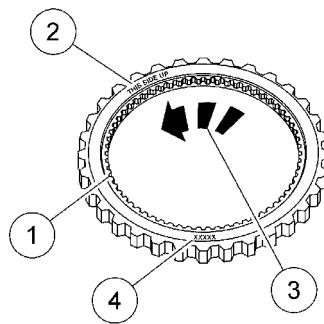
Overdrive One-Way Clutch Mechanical Diode
